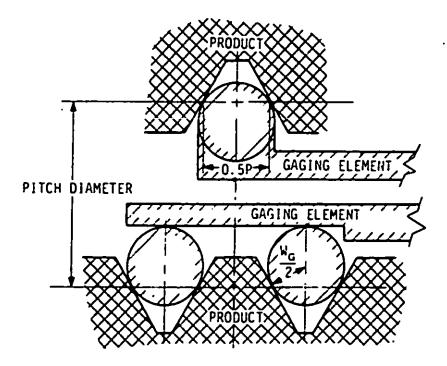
C.9 <u>Gaging element for product internal pitch diameter</u> measurement using "best size" balls.
